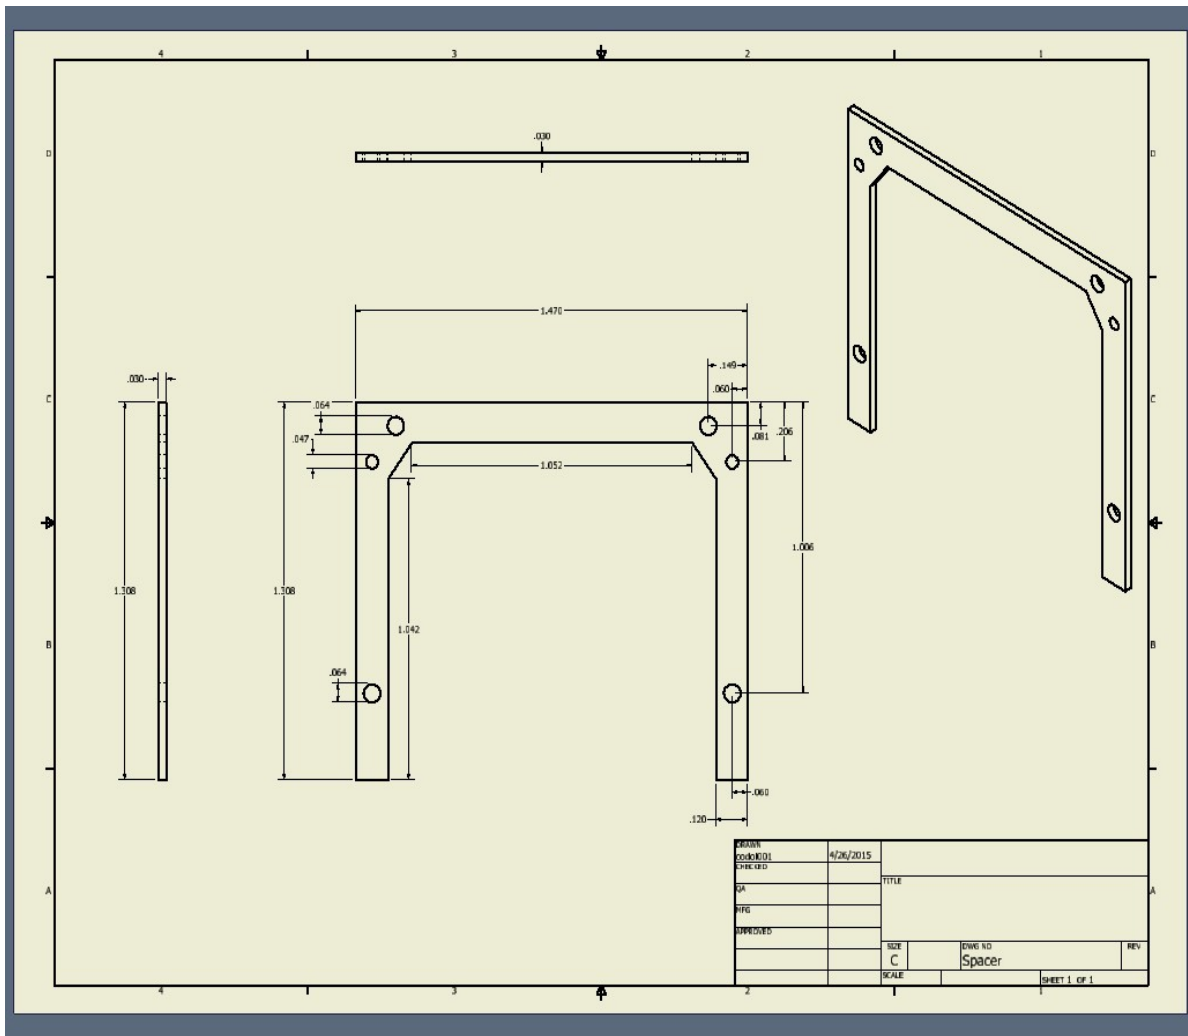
Copper spacer that separates the component side of the PCB board from the detector housing. Units shown are in inches.
